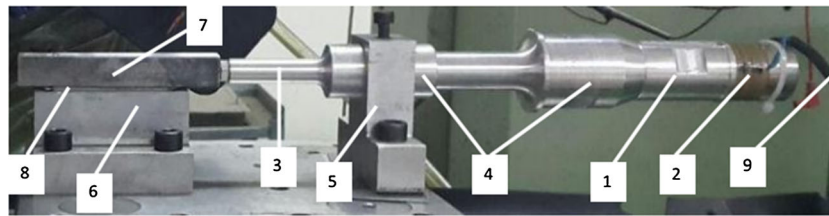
Ultrasonic-assisted grinding setup: 1 transducer, 2 piezoelectric rings, 3 horn, 4 booster, 5 transducer fixture, 6 workpiece fixture, 7 workpiece, 8 linear bearing, 9 ultrasonic power supply cable
